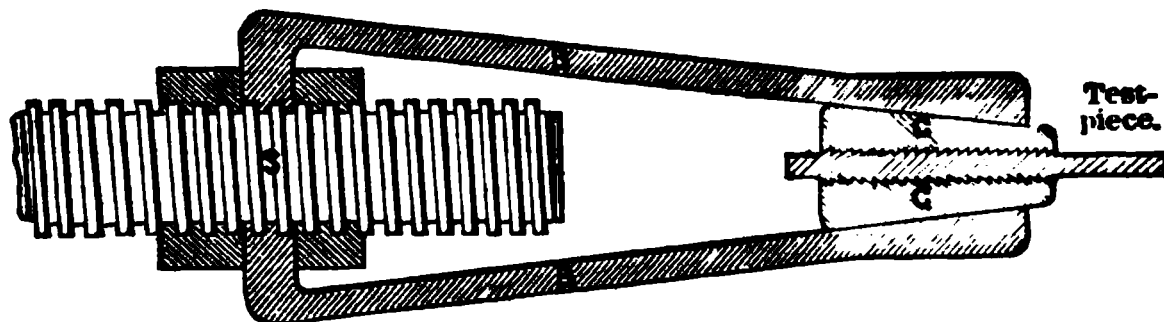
One Form of the Bridle and Grip for holding the Test-pieces in the Testing Machine. (p.352).
